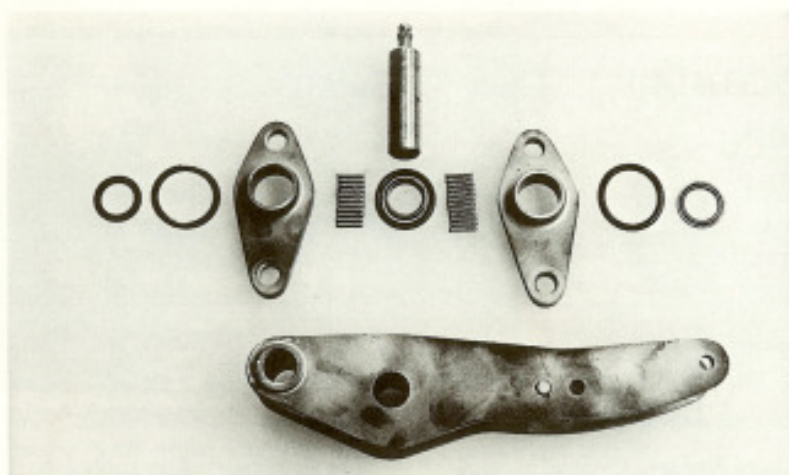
Master cylinder balance lever, exploded view, with operating lever and one of the two sets of needle bearings. The balance lever balances the effects of the two master cylinders. It pivots in a needle roller bearing which is well protected and seldom causes trouble. At overhaul, replace the 3 rubber o-rings. Figure 18: Balance lever partially assembled: needle roller bearings are held in by heavy grease.
